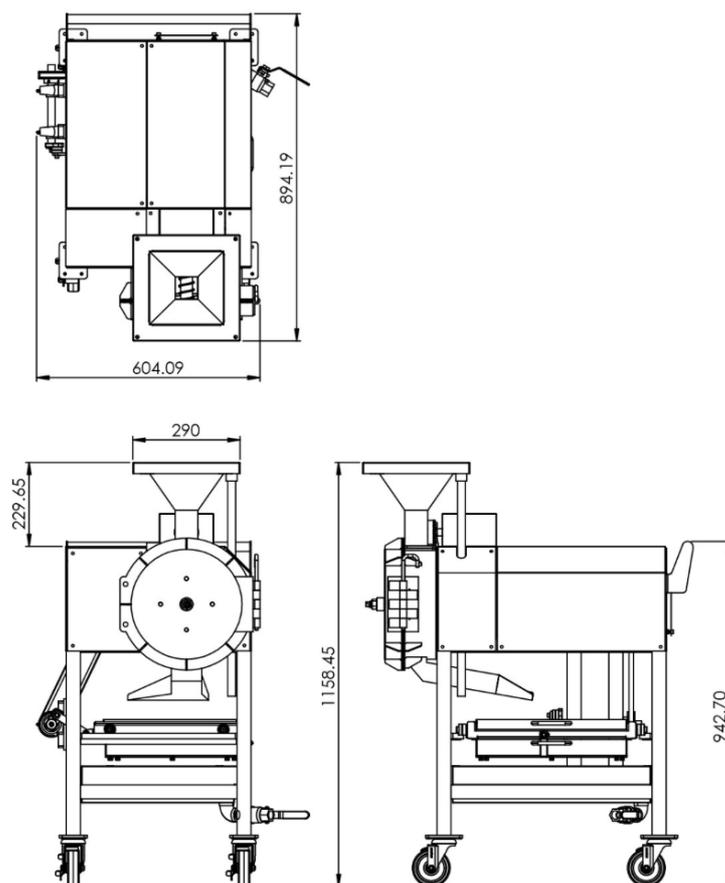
Overall dimensions of the 100 kg/hr Pepper Peel-O-Matic machine
